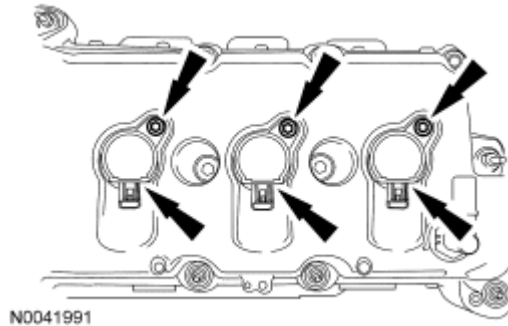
Locating LH Coil-On-Plug Assemblies And Bolts
